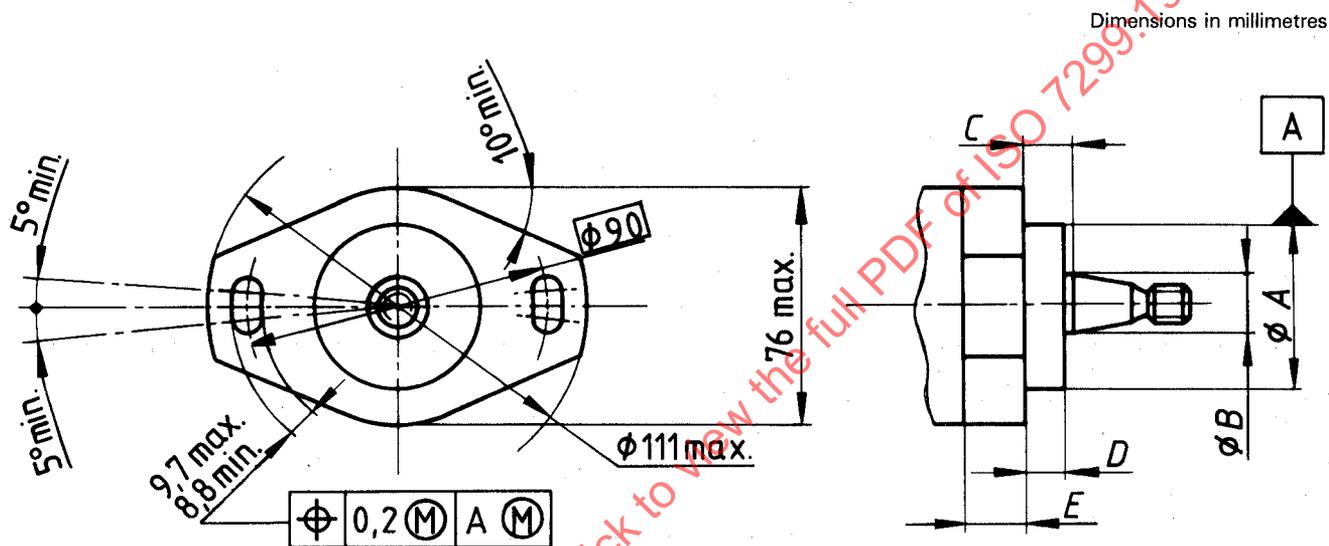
Rotary and distributor fuel injection pumps — Type 1 end-mounting flange
